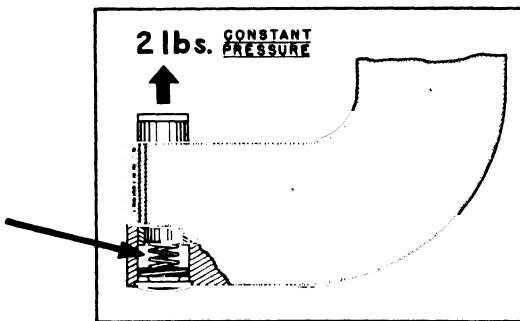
Cutaway view showing the spring-loaded reference anvil of the micrometer in Fig. 45.
